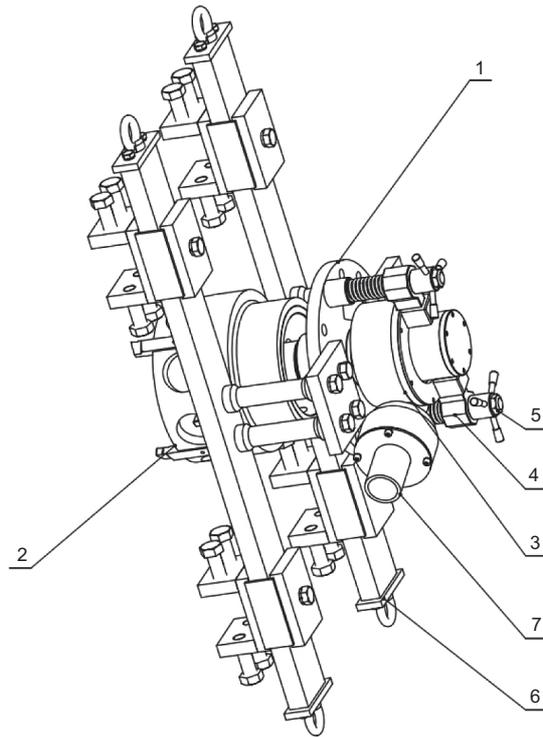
Milling machine construction: 1 – main plate with mandrel and threaded sleeve; 2 – milling head – depending on the chosen option: • for groove  $\varnothing 178$ –154 for seal  $\varnothing 176/\varnothing 156$ , • for groove  $\varnothing 220$ –196 for seal  $\varnothing 218/\varnothing 198$ , • for groove  $\varnothing 246$ –222 for seal  $\varnothing 244/\varnothing 224$  L = 190/120, • for groove  $\varnothing 246$ –222 for seal  $\varnothing 244/\varnothing 224$  L = 250/180; 3 – worm gear; 4 – hub with guides and mounting device, 5 – mounting to main plate device, 6 – guides with mounting – depending on the chosen option: • round for mounting milling machine with handles, • rectangular for mounting the milling machine with handles; 7 – planetary gear with driving system housing
